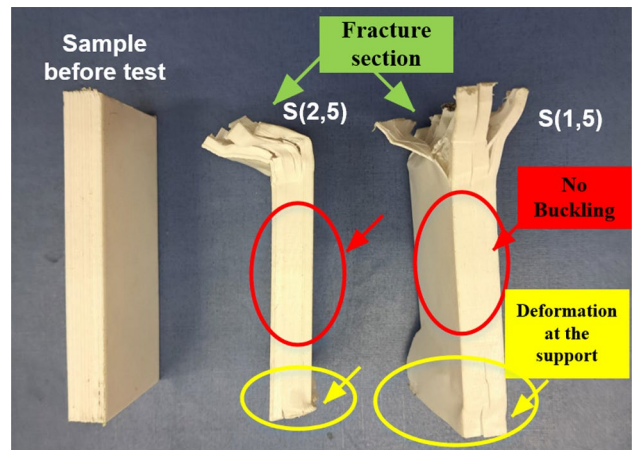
Fracture surface of produced samples (1,5) and (2,5)
